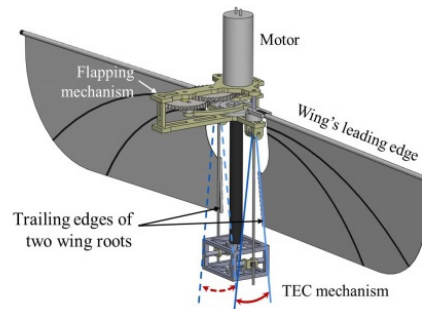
Concept of the current flapping-wing robot (FW-robot) with the TEC mechanism
